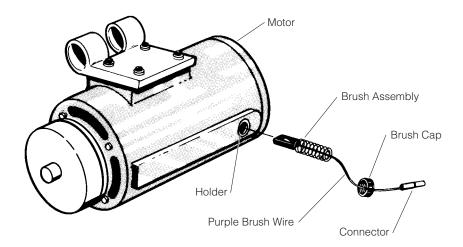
Removing the Wired Brush Assembly for Replacement
